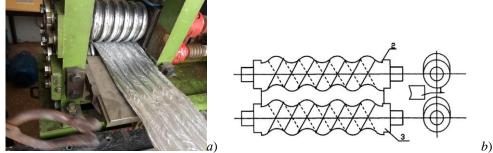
The rolling mill DUO with the helical rolls: 1 – the workpiece; 2 – the upper roll; 3 – the bottom roll: a – a rolling mill; b – a rolling pattern
